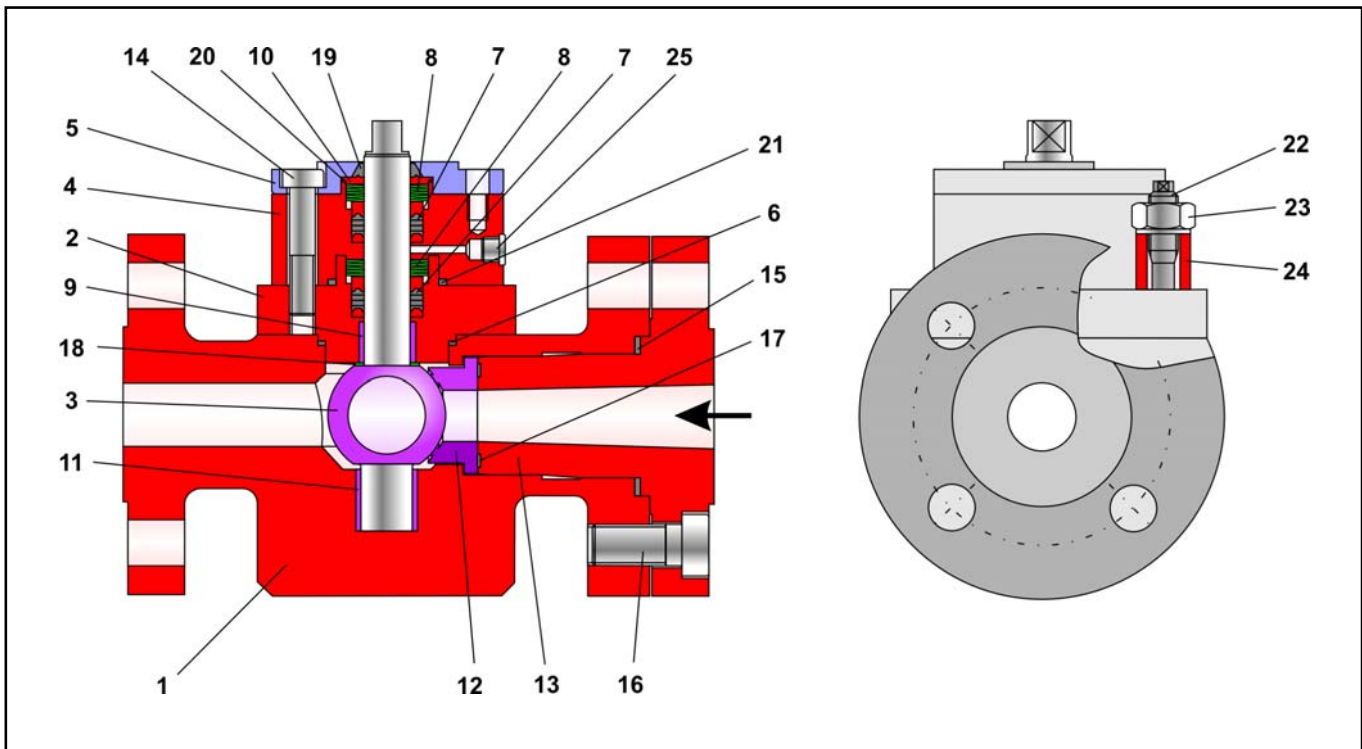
Sectional diagram of Series 23k Rotary Plug Valve
